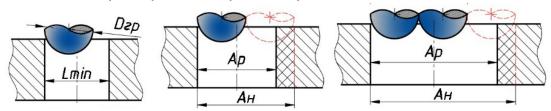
Dimensions of holes that prevent jamming of the working environment bodies:
